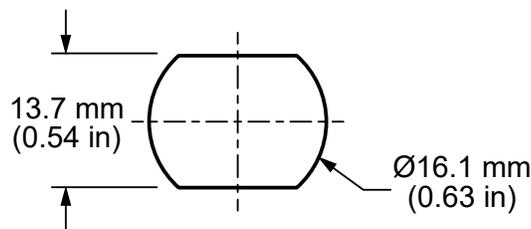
ANT-8/9-SPNF2 Mounting Hole Dimensions
